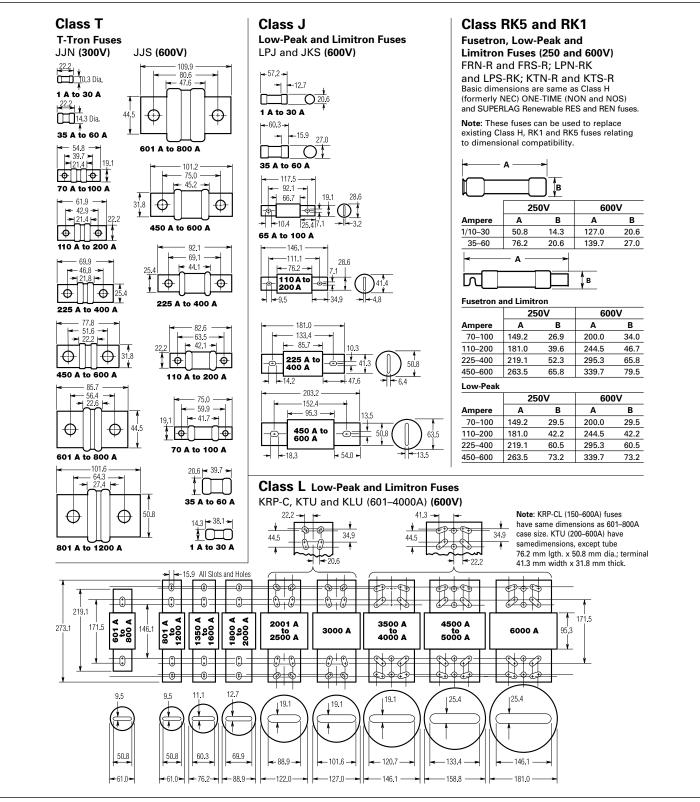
Typical Fuse Dimensions in Millimeters
